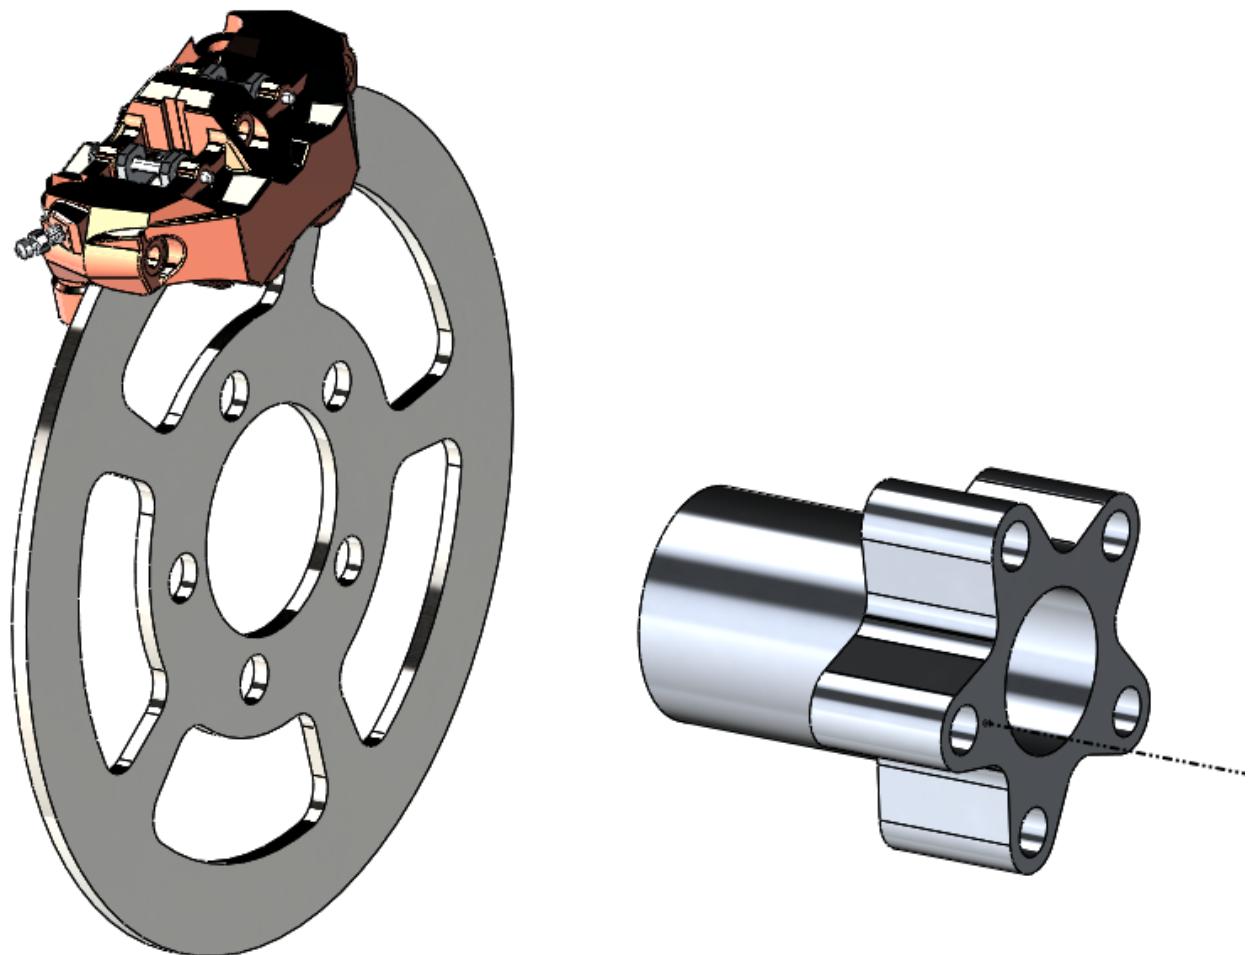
Hirani, Asimm: Assembly Step 3
